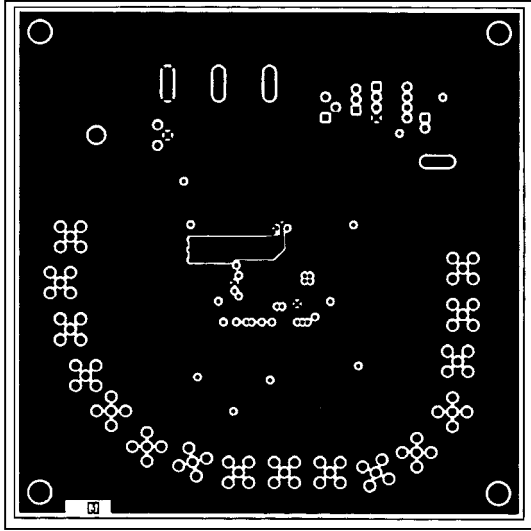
MAX555 EV Kit PC Board Layout—Layer 3 (Power Layer)
